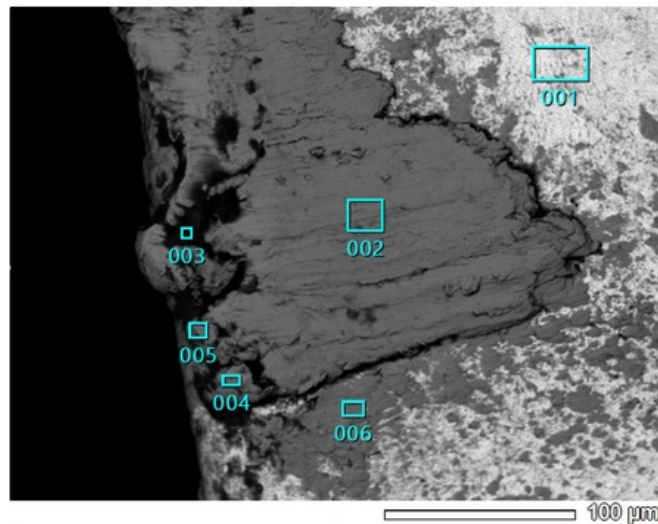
TNGG cutting tool after Optimal machining 3D printed Ti-64.
